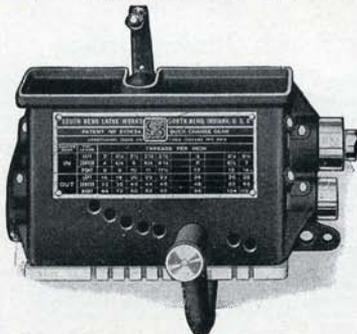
Quick Change Gear Box for 9-inch Junior Lathes. Provides for cutting screw threads from 2 to 112 per inch without removing a gear. Must be fitted at factory when lathe is purchased. Cat. No. 171. Price.....\$45.00
